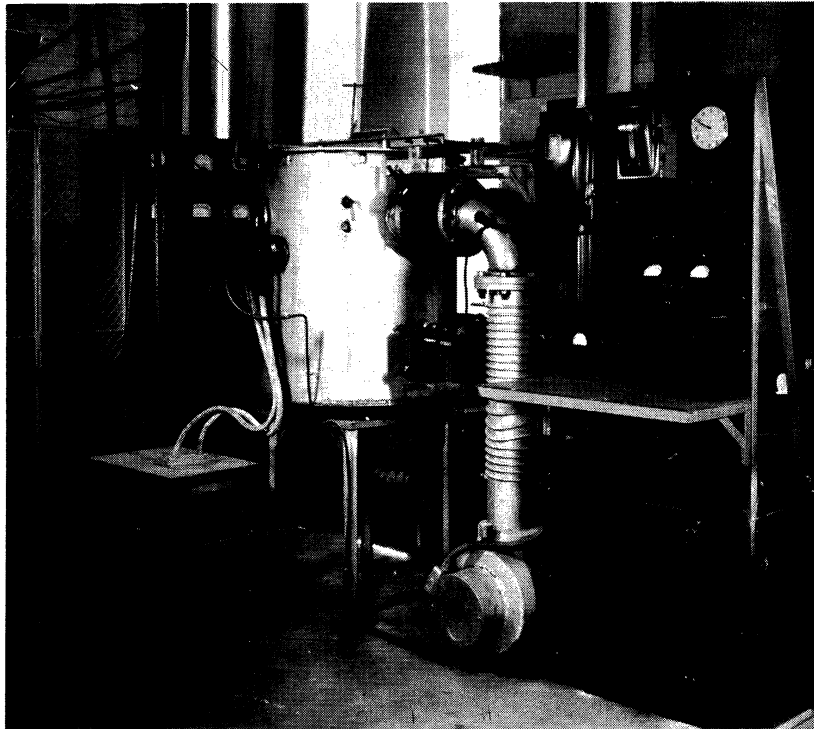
Photograph of Vacuum Induction Melting Equipment Showing Control Panels, Melting Shell, and Vacuum Pumps.
